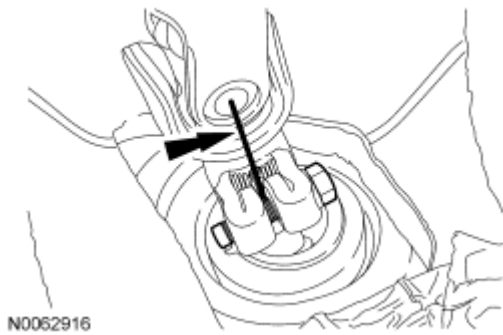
Locating Steering Column Shaft-To-Steering Gear Position Index-Mark
